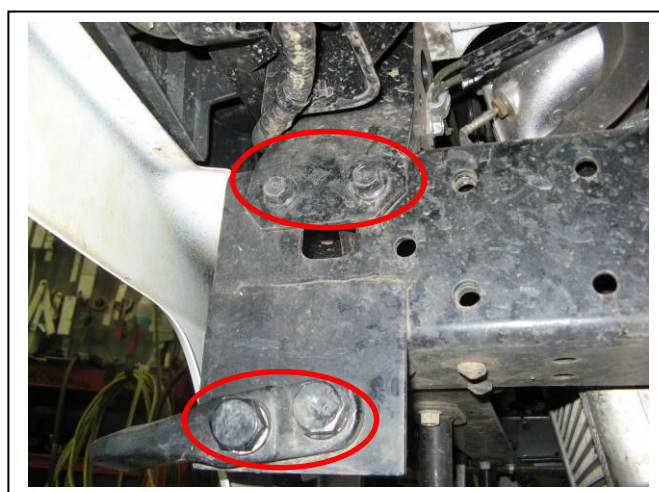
Passengers side 14mm and 21mm bolts to be removed for fitment.
